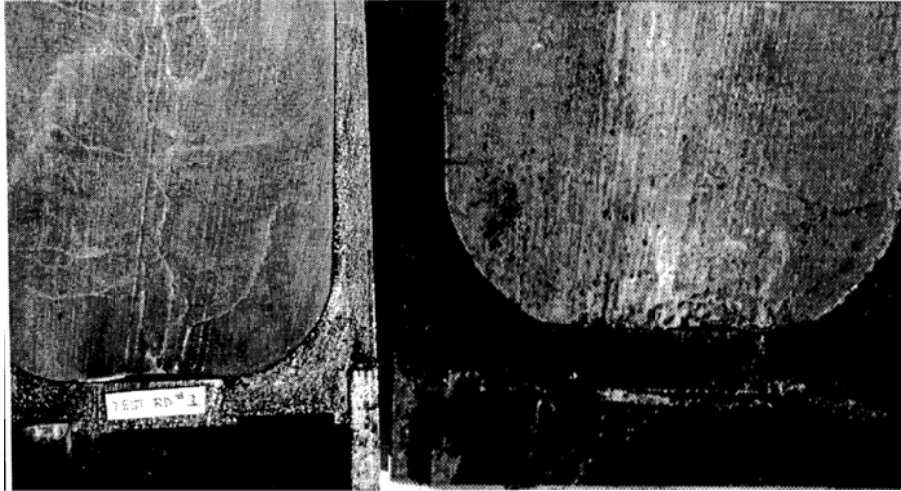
Photographs cross sectioned 155mm Comp-B cast projectiles with observable cracks (left) and porosity (right) in the explosive fill [16].
